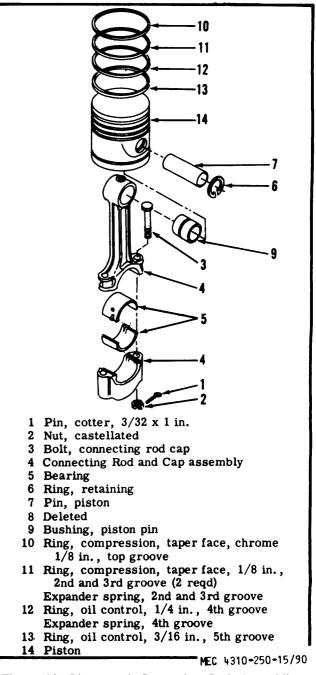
Piston and Connecting Rod Assemblies, Disassembly and Reassembly.
